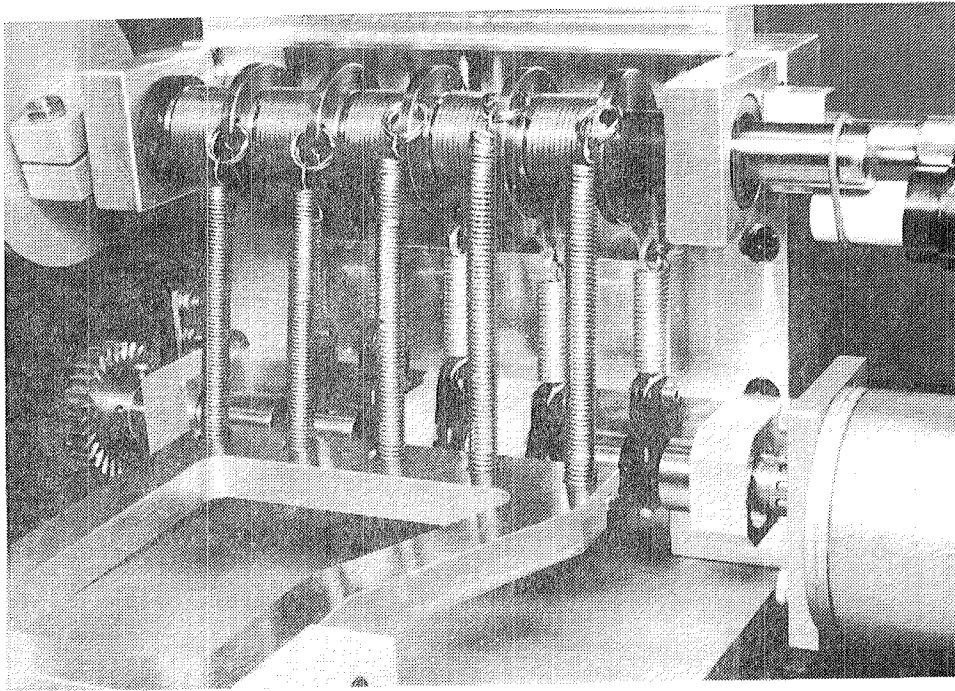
Photograph of Device 5FX, showing the wrap-spring one-way clutches (seen around upper horizontal shaft), drive springs (the shorter set), and the return springs (the longer springs in front).
